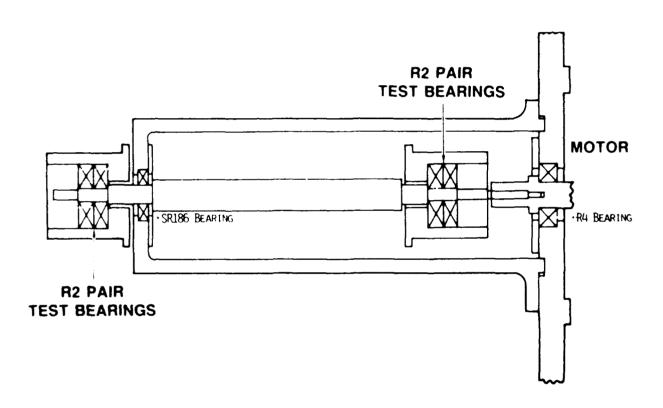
Cross Section Showing the Orientation of Two Bearing Test Cells Relative to the Motor Position
